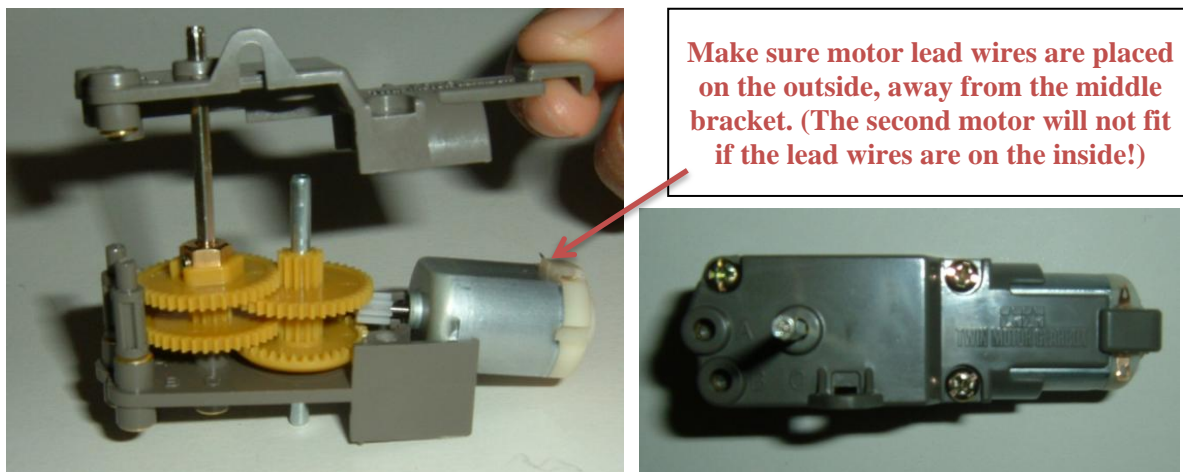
a) Motor Placement with Gearbox Side Mounting and b) Screw Placement
